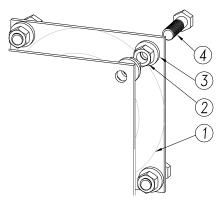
Flat Washer (3) must be placed against "rubber side" (1) of Spring Mount
